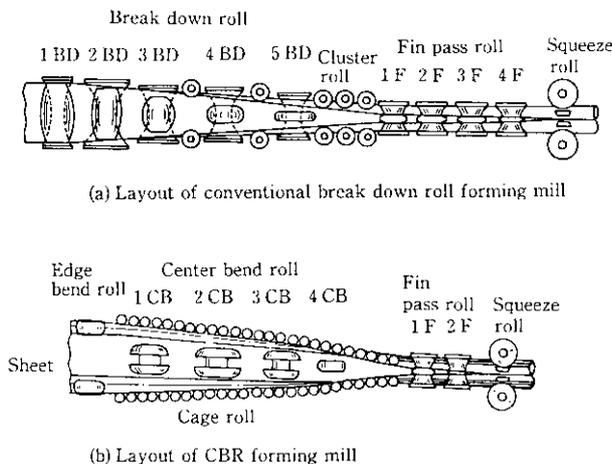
Comparison of layout of forming mill between conventional forming process and CBR forming process
